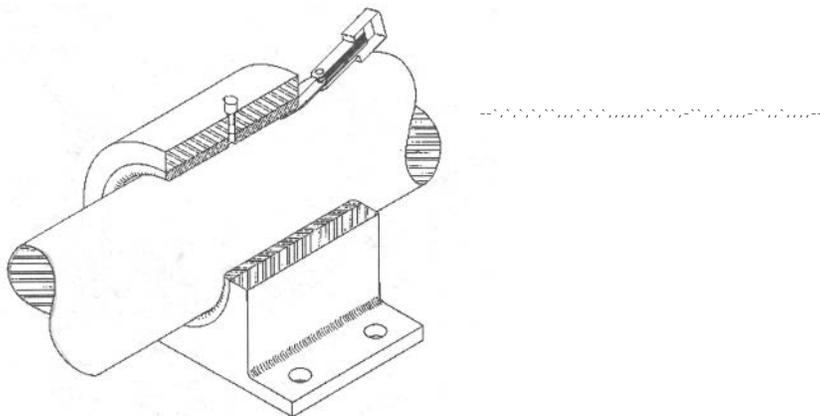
Measuring internal clearance in a sleeve bearing with feeler gauges
